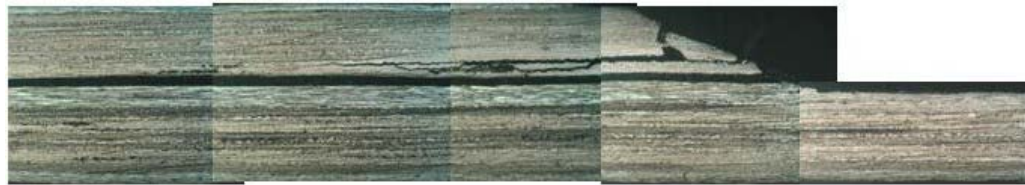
Damage progression and failure modes of a LQ joint specimen.
